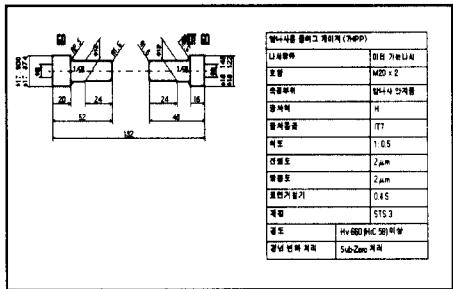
Plug gauge for metric fine screw thread - Minor diameter
